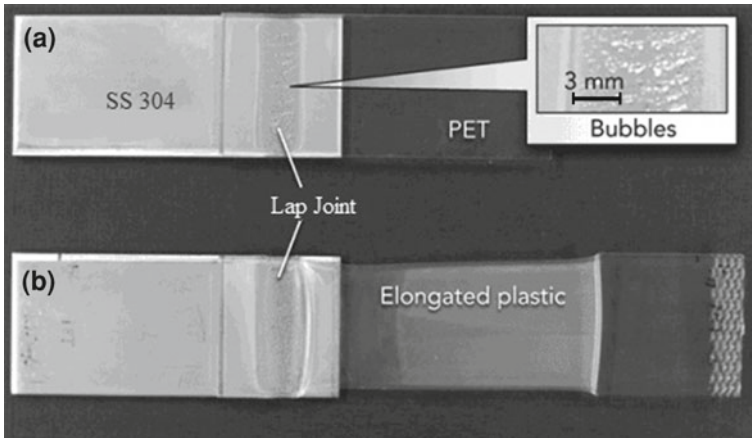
Joining of PET plastic to AISI 304 stainless steel produced with the laser beam before (a) and after (b) [56]
